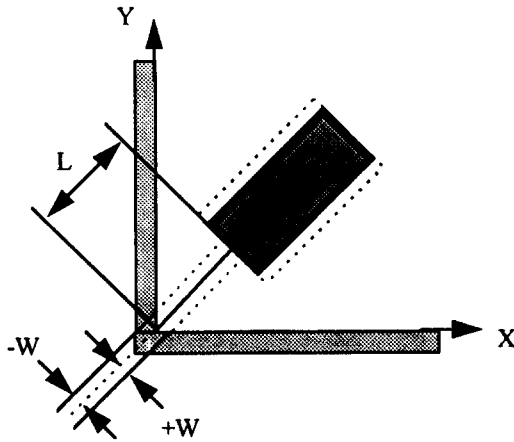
Offset of Weaving & Tip-to-Workpiece Distance
